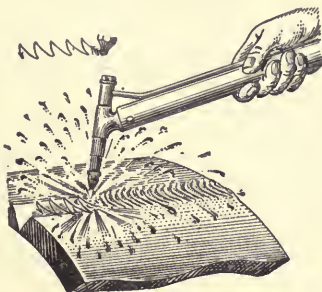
Oscillatory movement for the execution of welds of great thickness.
